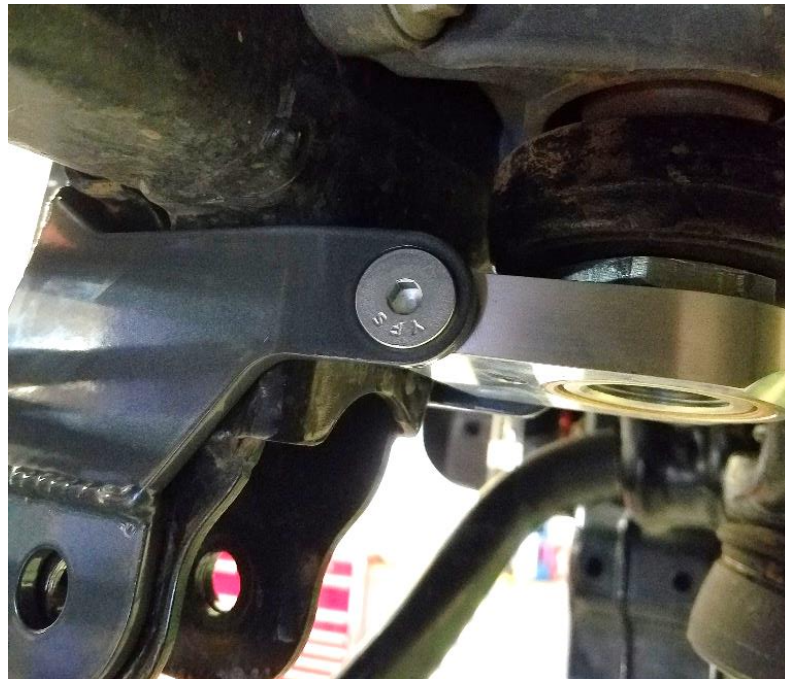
Installing Flat Head Screw in Back of Synergy Sector Shaft Brace
